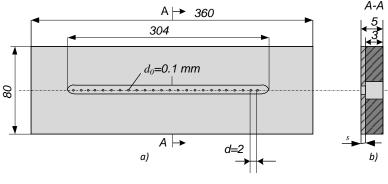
Perforated plate of the FBG a) plan view; b) cross-section
